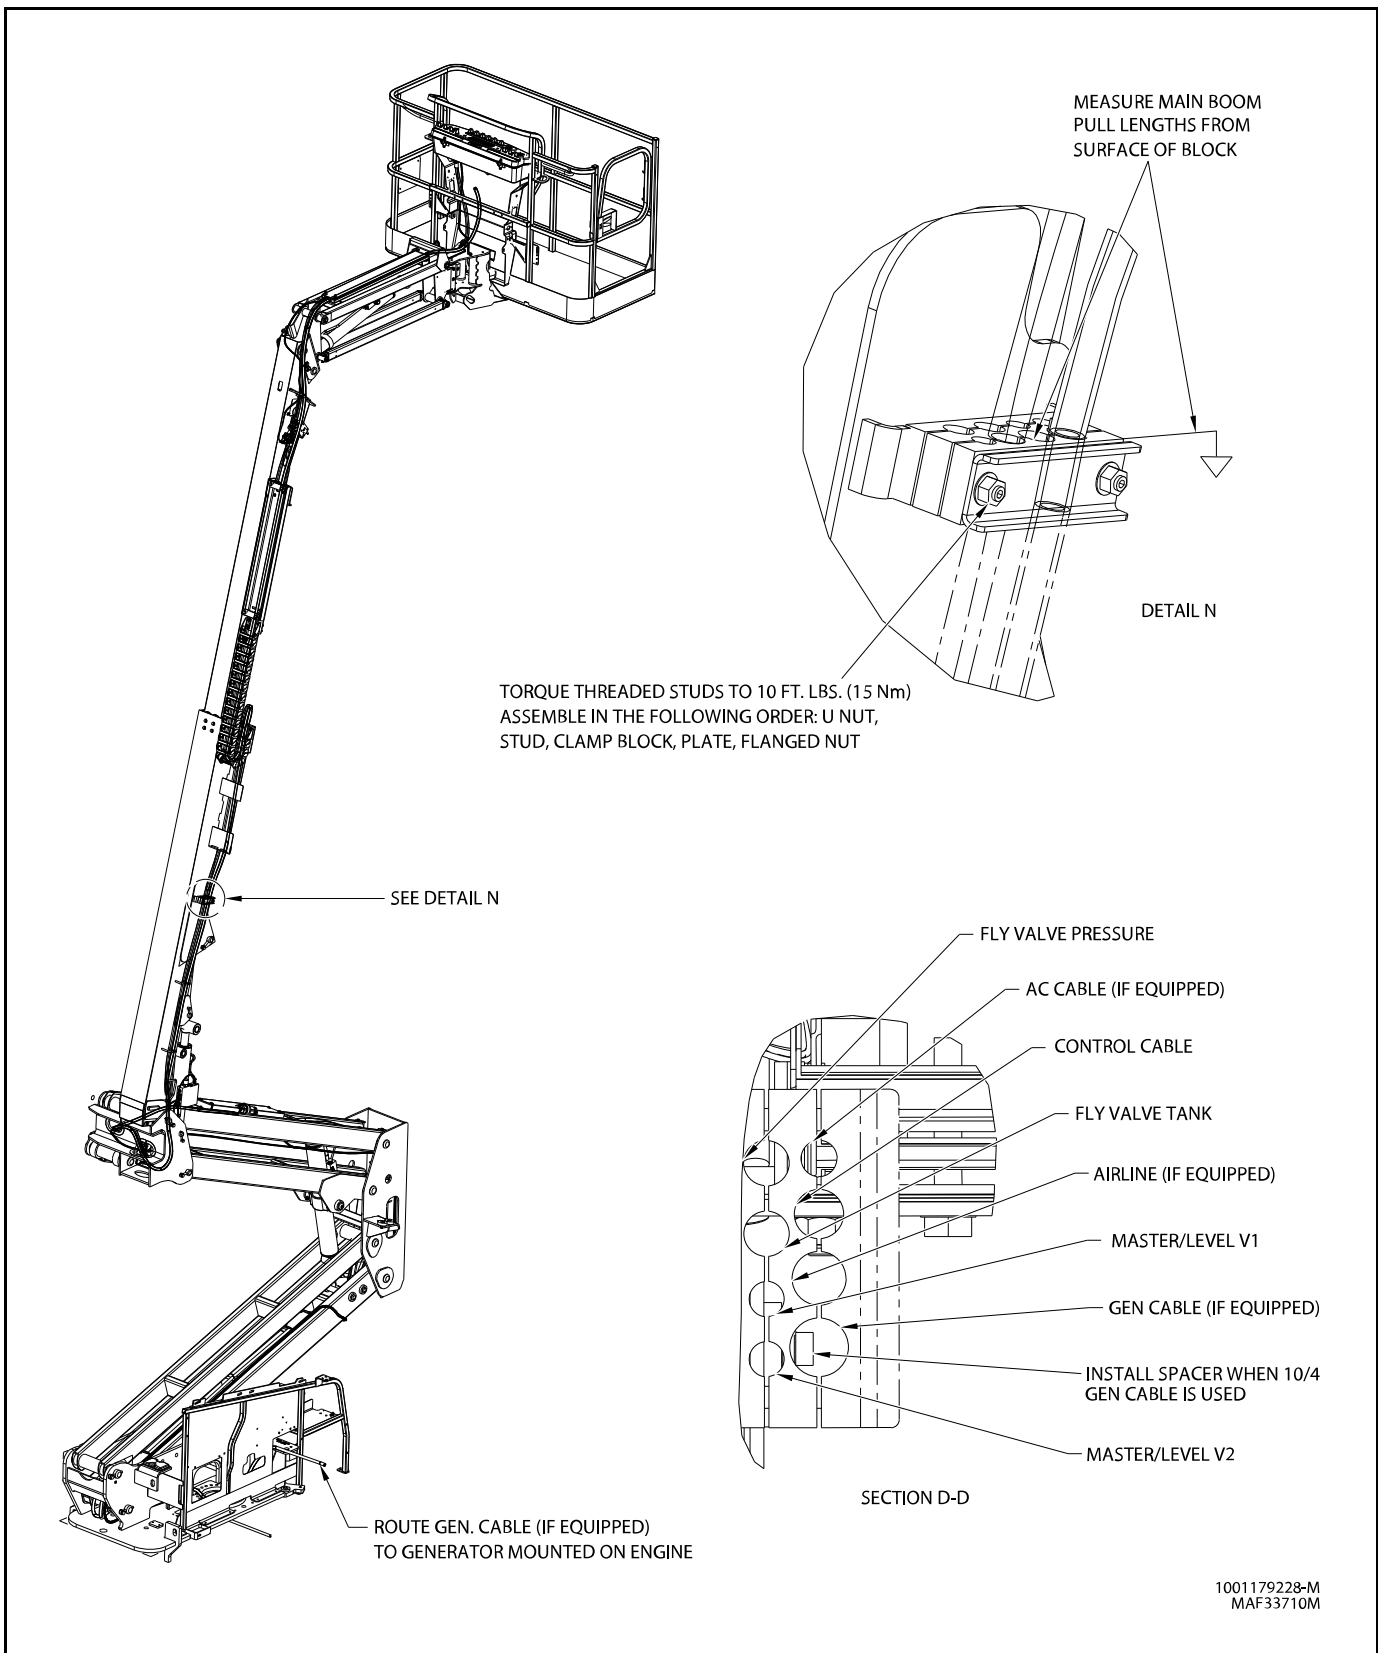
Cables and Clamps Installation - Sheet 4 of 8
